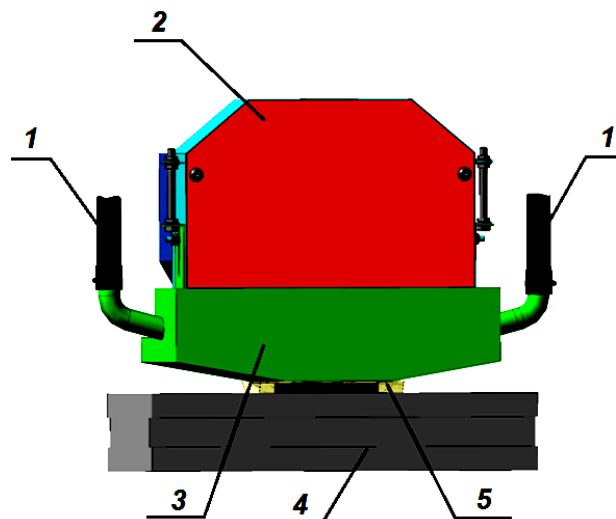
A new device of combined coolant supply for flat grinding with the wheel periphery:
